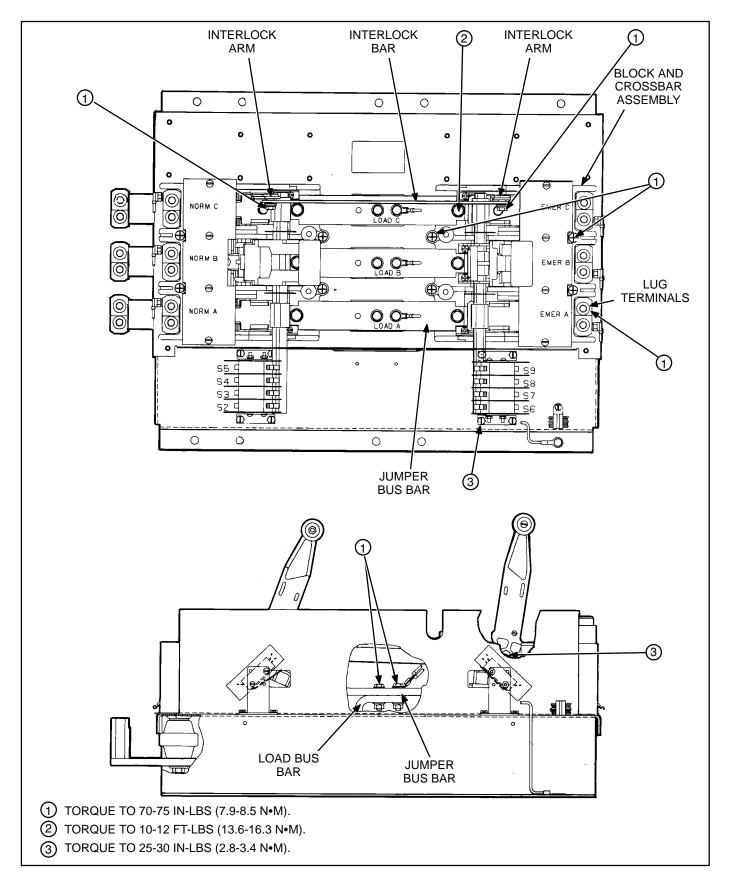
3-POLE SWITCH ASSEMBLY (300 TO 600 AMPERES)
